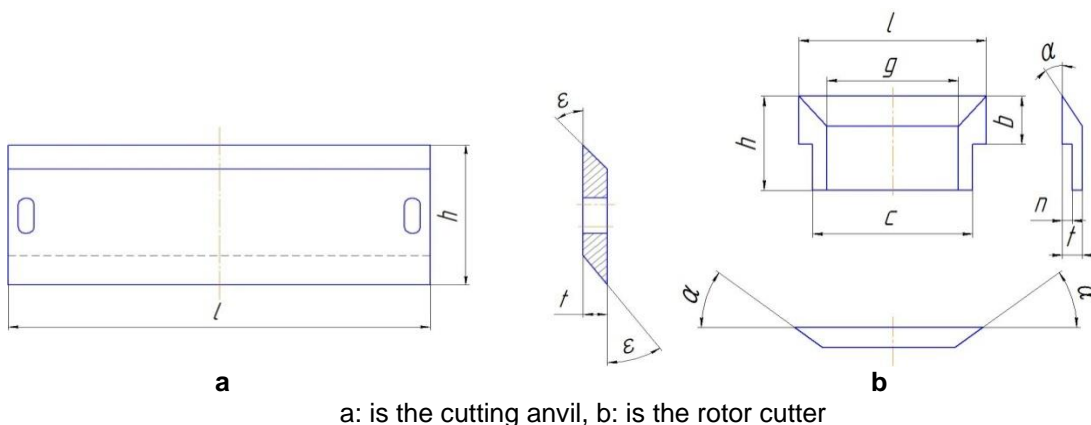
General view of the grinding cutters (α is the sharpening angle, °; h is the cutter height, mm; l is the cutting edge length, mm; g is the cutter length, mm; t is the cutter thickness, mm; b is the groove height, mm; n is the groove depth, mm; c is the cutter base length, mm)
